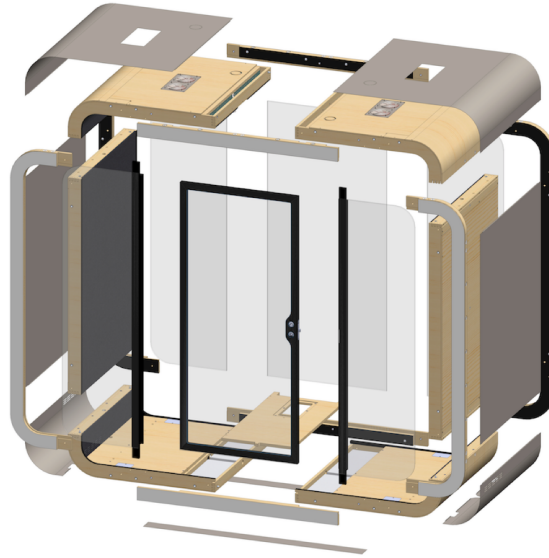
Exploded view of the model Q without furniture, table and carpet.
